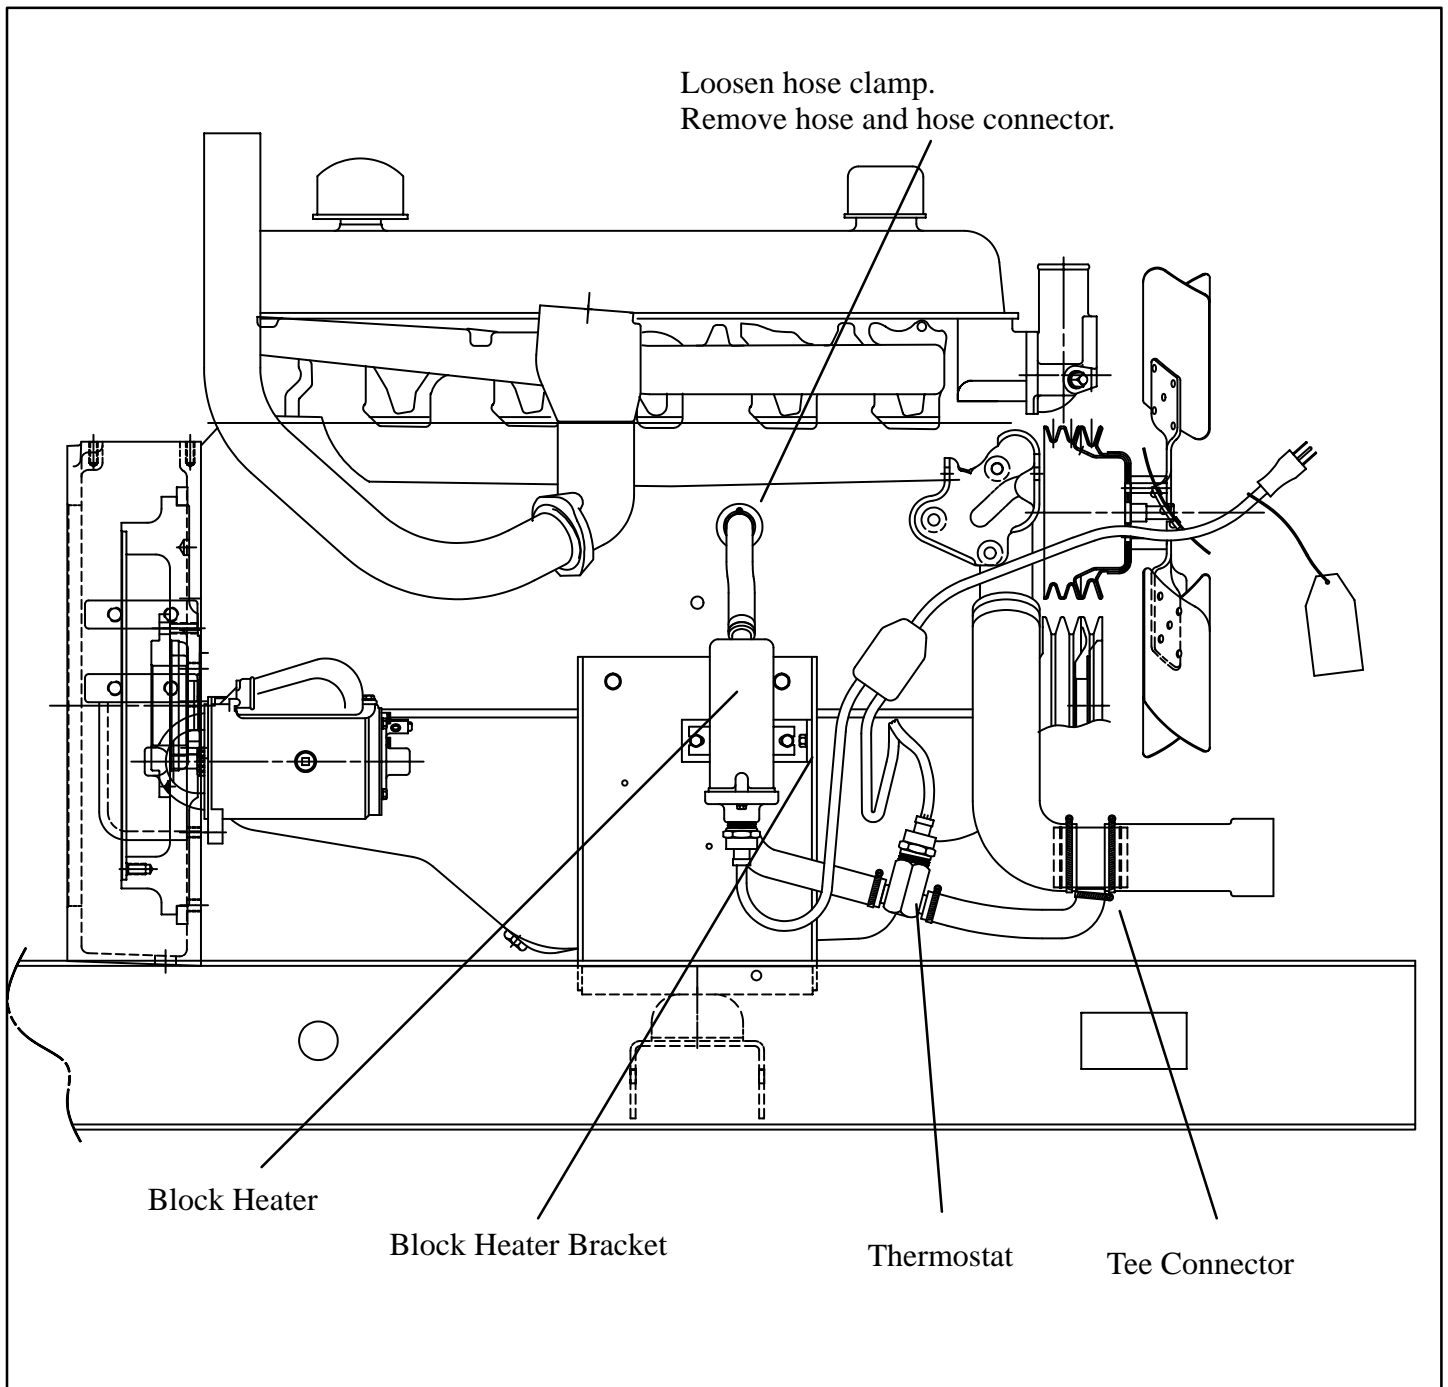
Removal of Early Version Tank Type Block Heater Kit
